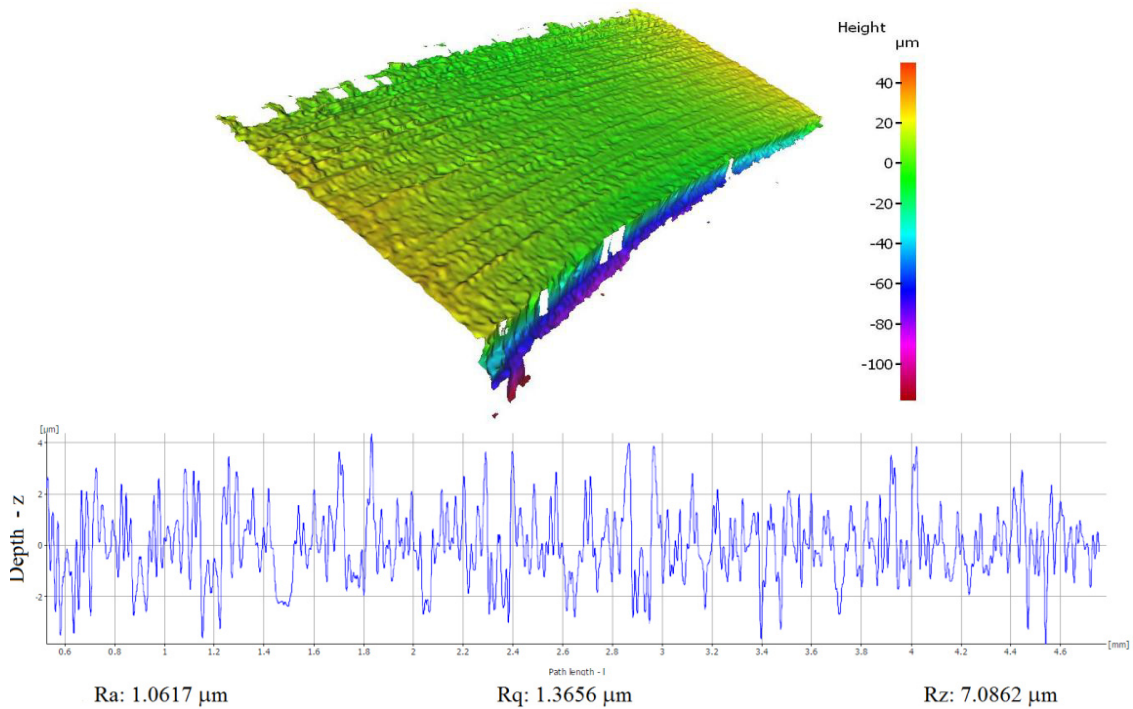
An example of machined surface quality evaluation – thread made with the HSSE+TiN+DLC cutting tap.
